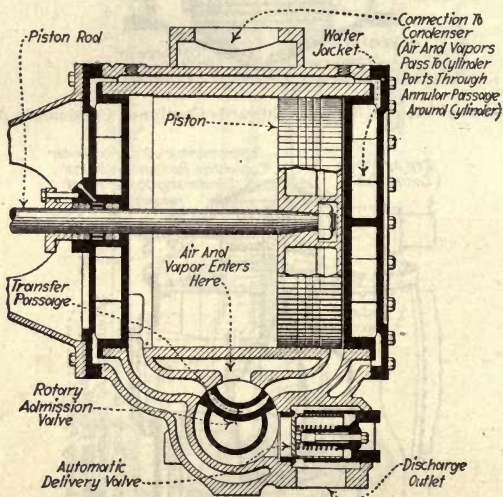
Wheeler Dry-Vacuum Pump (Single-Valve Type). (The function of the rotary admission valve is: (1) To connect the discharge outlet and inlet port alternately with opposite ends of the pump cylinder. (2) To release the compressed air in the clearance space at one end of the cylinder through the transfer passage to the other end of the cylinder. Compressed air in the clearance space is in this way released into the other end of the cylinder instead of back into the suction pipe where it would tend to decrease condenser vacuum.)
